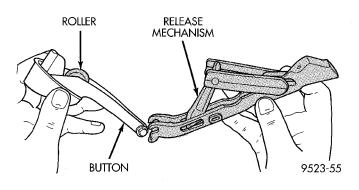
Sliding Door Inside Latch ReleaseMechanism
